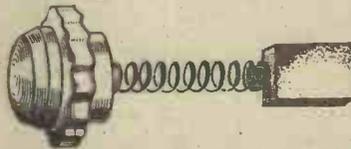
Brush assembly, consisting of brush, spring and plug.
